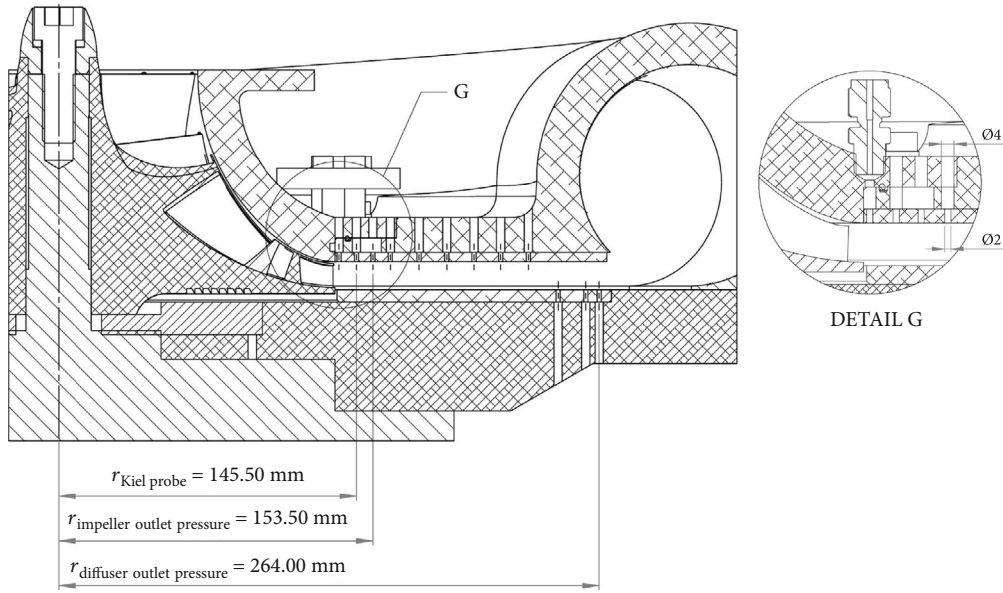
Measurement locations of total pressure and temperature (Kiel probe) at the impeller outlet and static pressure at the impeller and diffuser outlets. Detail G shows the dimensions of the static pressure taps.
